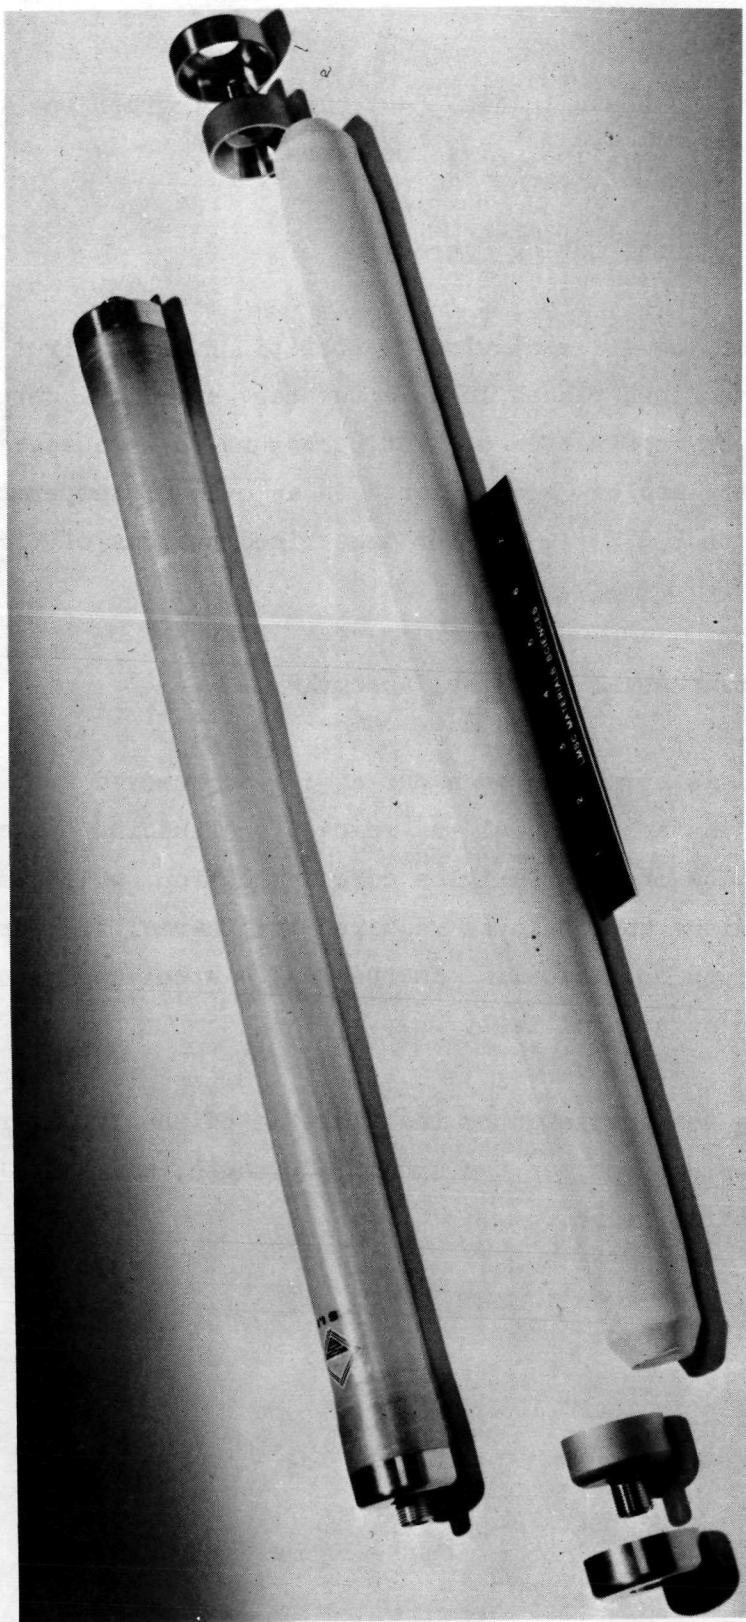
Typical Salt Mandrel, End Fittings, and a Completed III-1 Specimen
